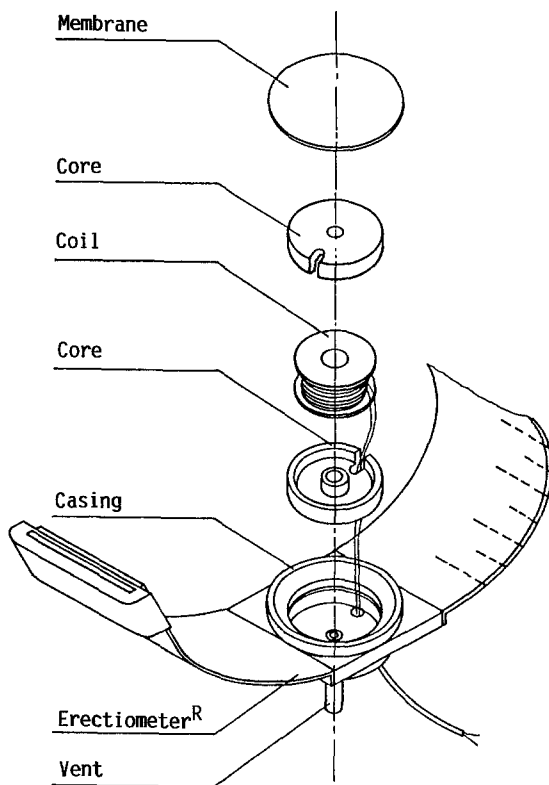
Exploded view of the mini-vibrator. Components are made of the following materials: membrane, silicone rubber; core, ferroxcube; coil, makrolon polycarbonate spool with 125 windings of copper thread (0.15 mm diameter); casing, celoron; vent, stainless steel (external diameter 2.0 mm; internal diameter 1.6 mm)
